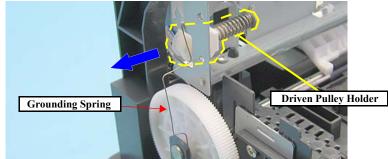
Removing Grounding Spring and Driven Pulley Holder
